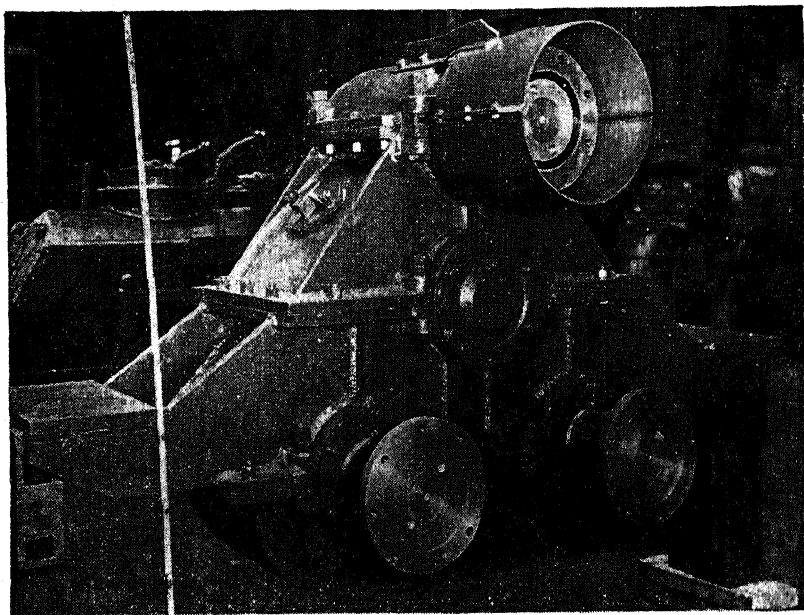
An arc welded propelling drive unit for an ore bridge.
